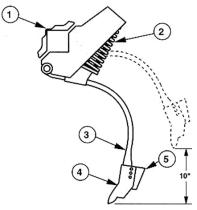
Edge-on Shank Assembly: (1) Frame Mount, (2) Compression Spring, (3) Edge-on Shank, (4) Opener and (5) Seed Boot.
